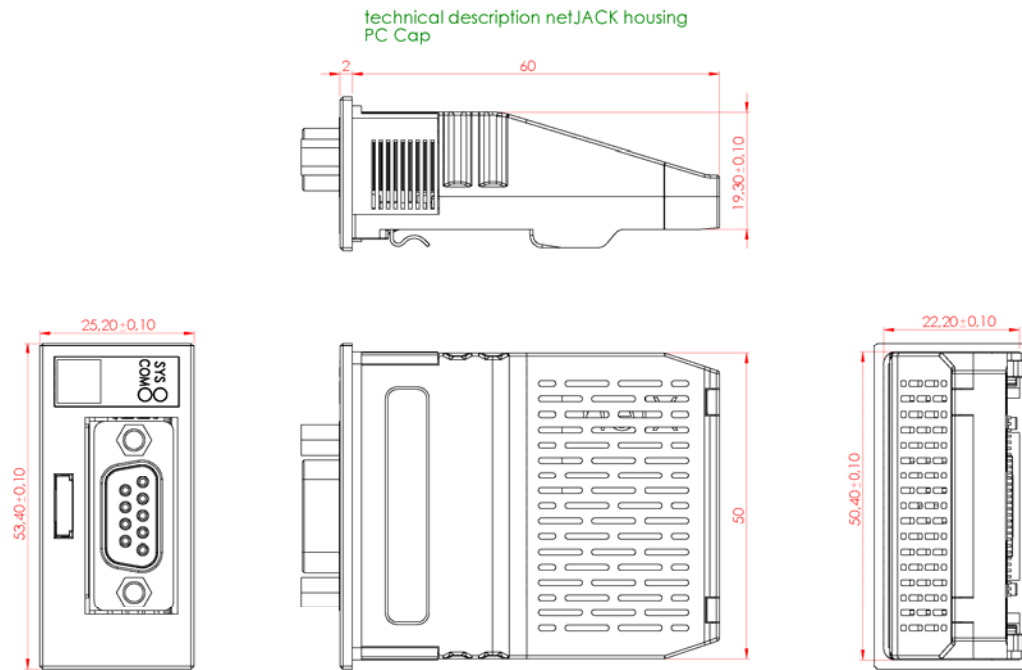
Dimensions of netJACK Module – Housing with Plastic Cap
